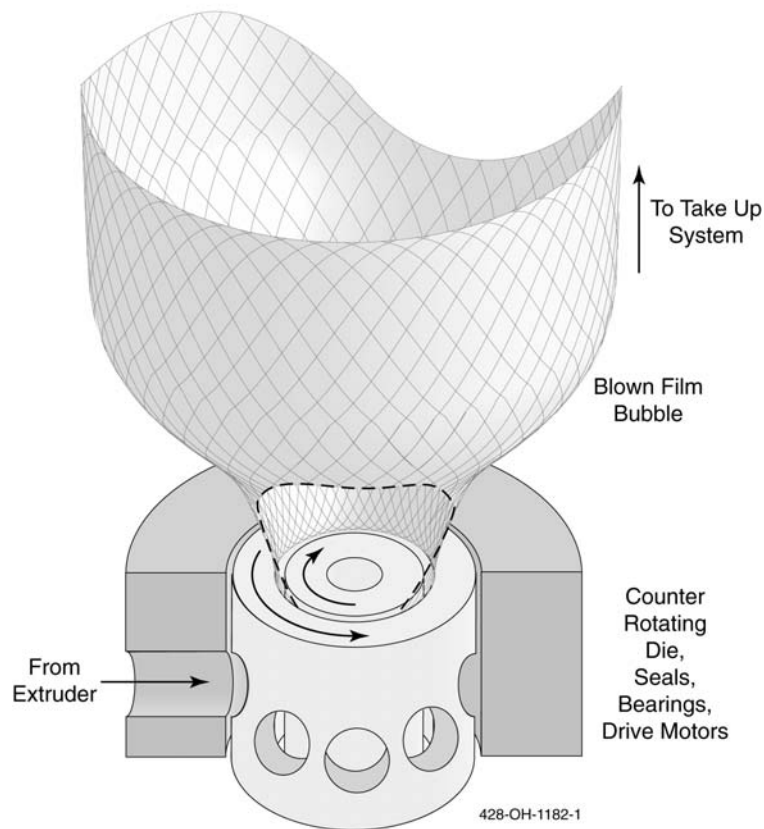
Schematic of Counter-Rotating Die and Extrusion [24]
